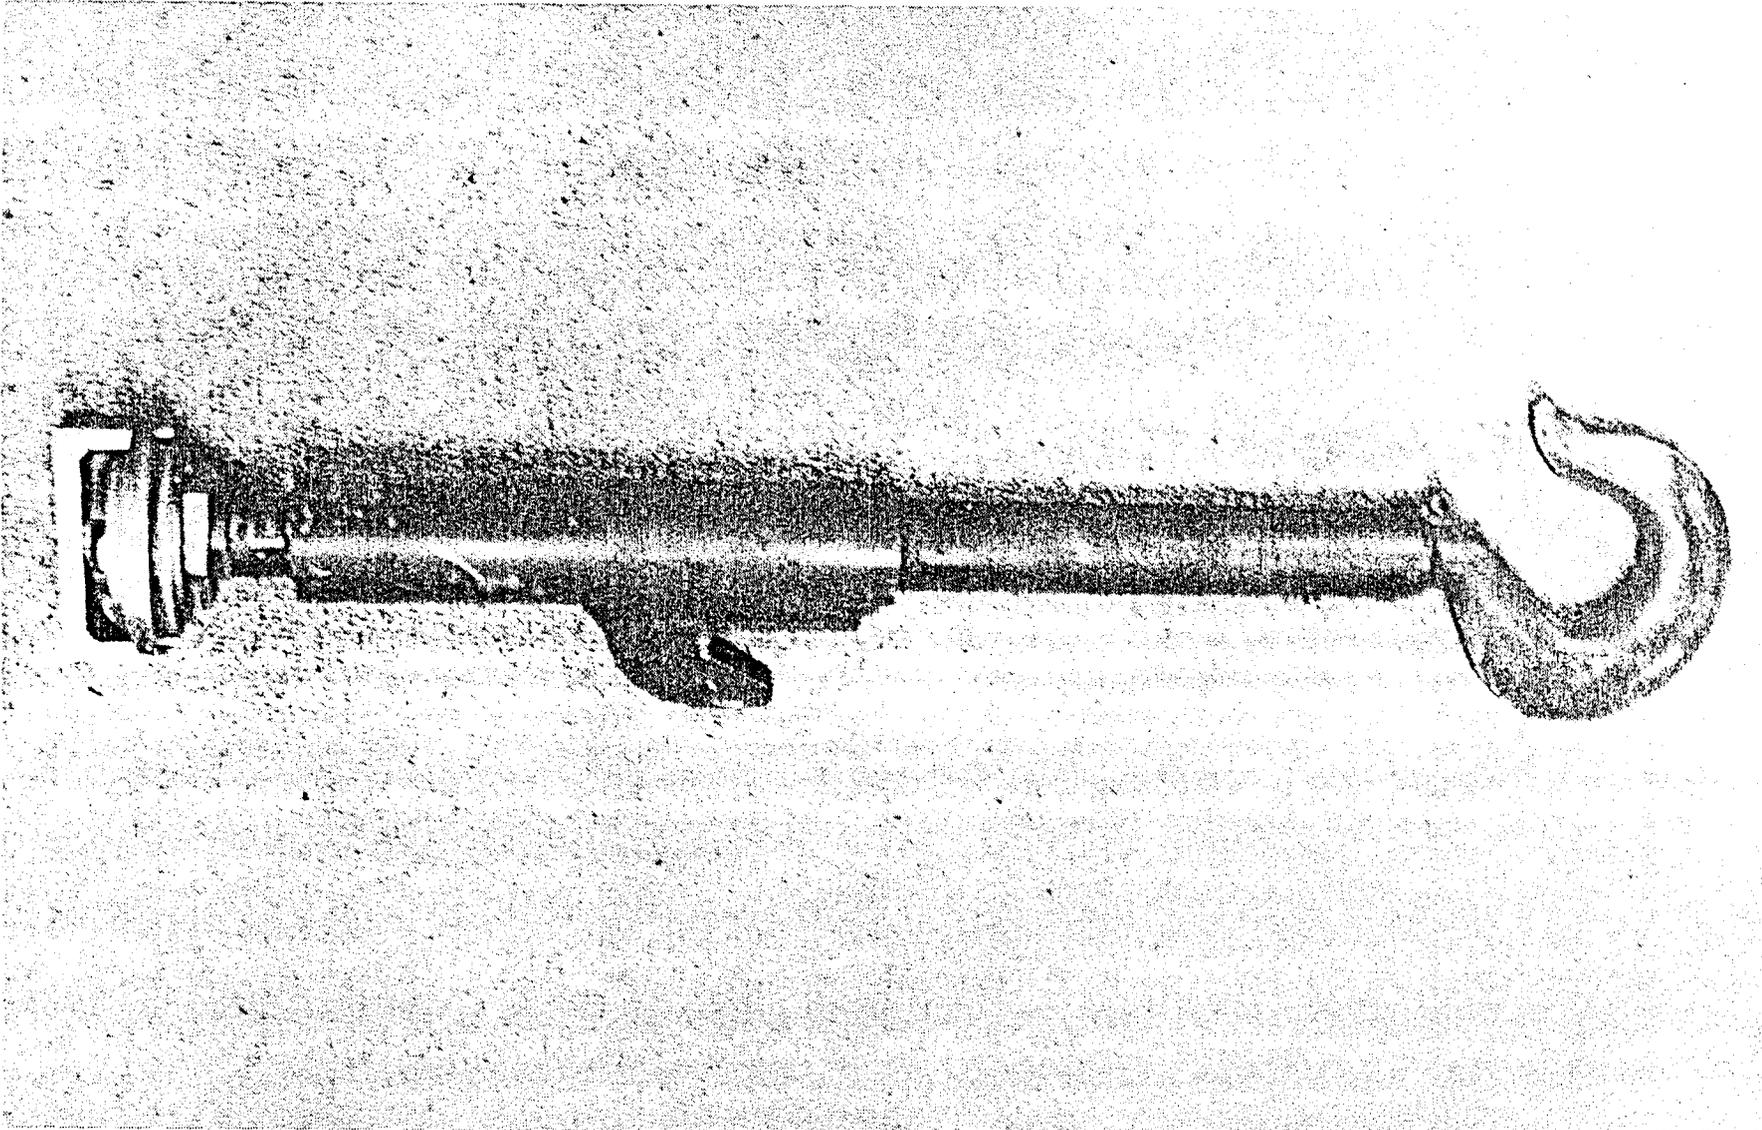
CLTD Manufacture, Completed Unit—Fully Extended.
